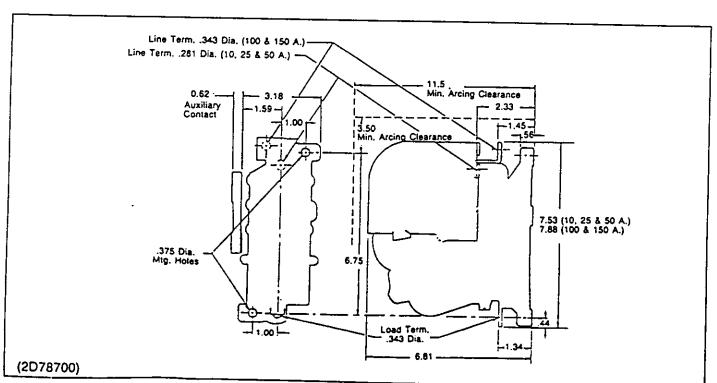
Dimension Drawings (Dim. in inches) of 1 NO Pole MME Contactor
